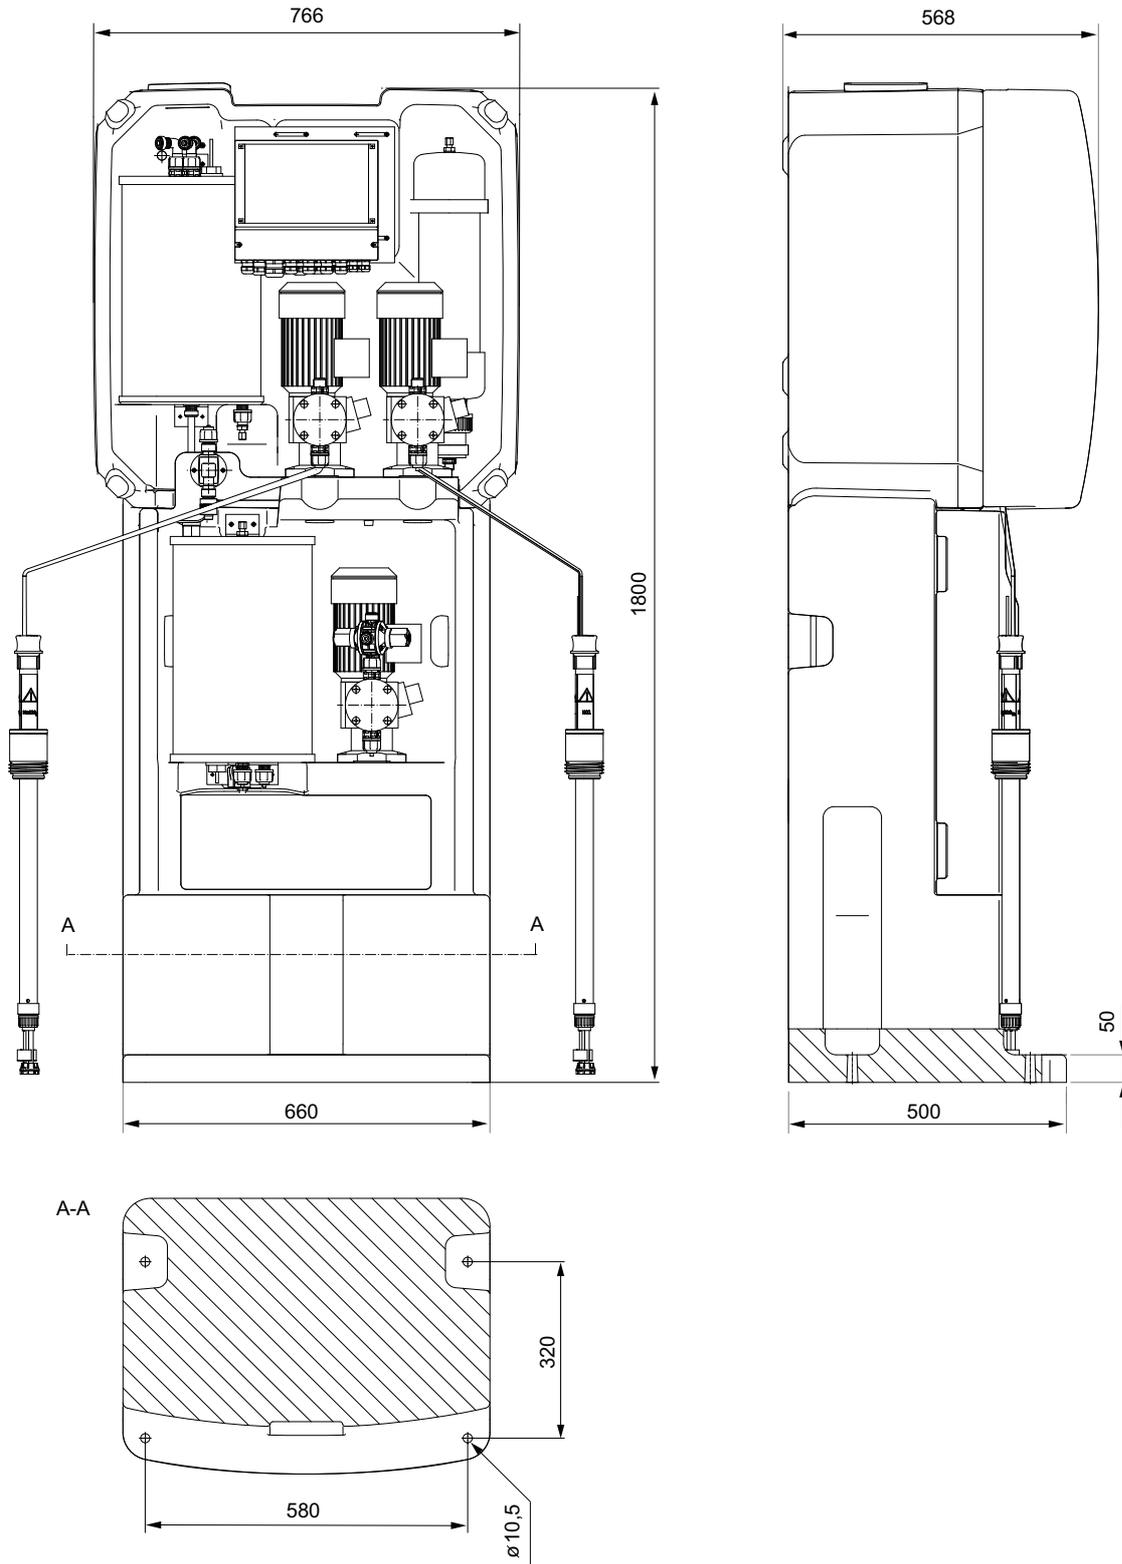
Oxiperm Pro with drill holes (OCD-162-30, -60)
